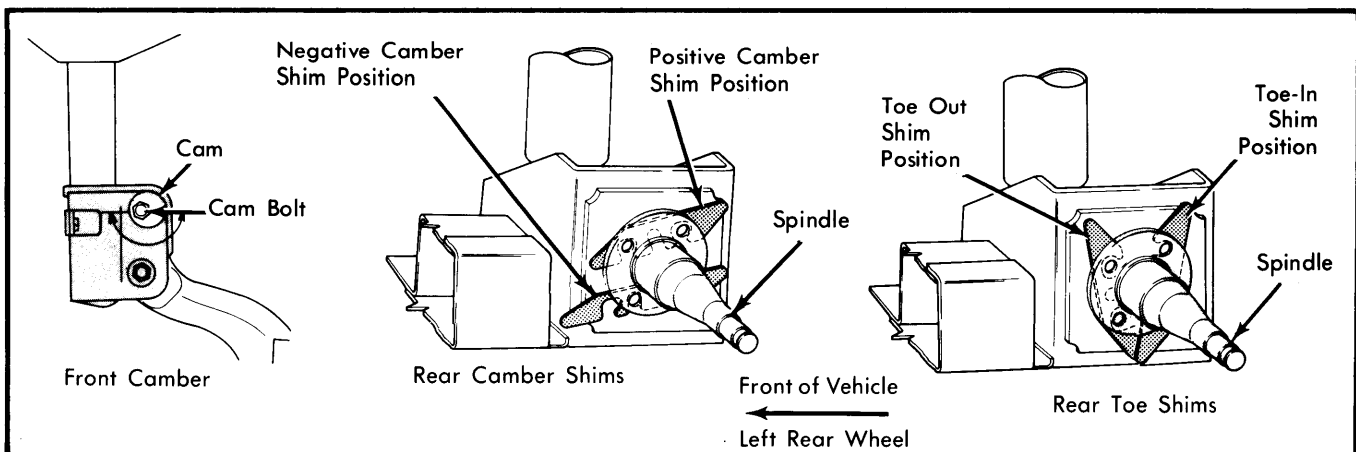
Adjusting Front Camber, Rear Camber and Toe-in on Front Wheel Drive Models
